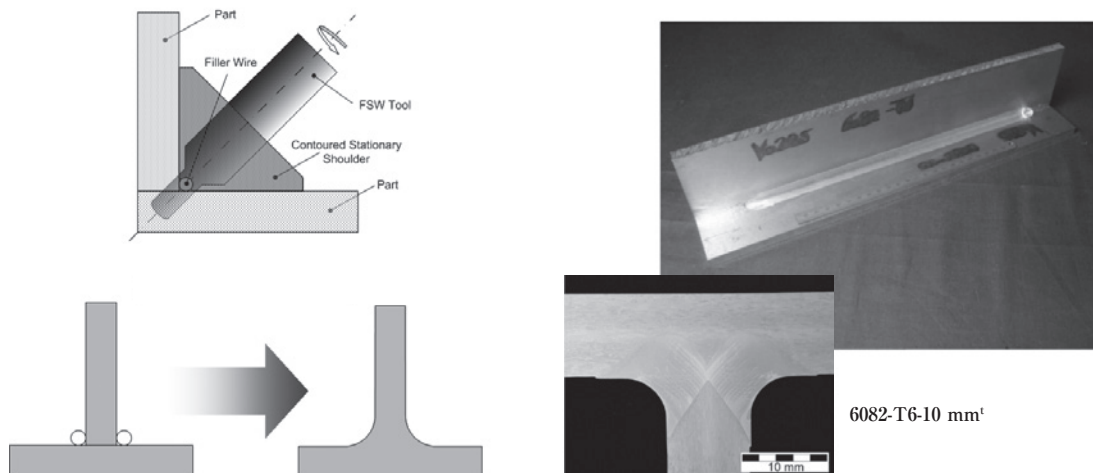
Stationary shoulder fillet FSW with a filler metal.
